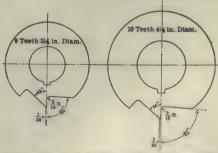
Form of Spiral Milling Cutters Now Used by the Cincinnati Milling Machine Co.
